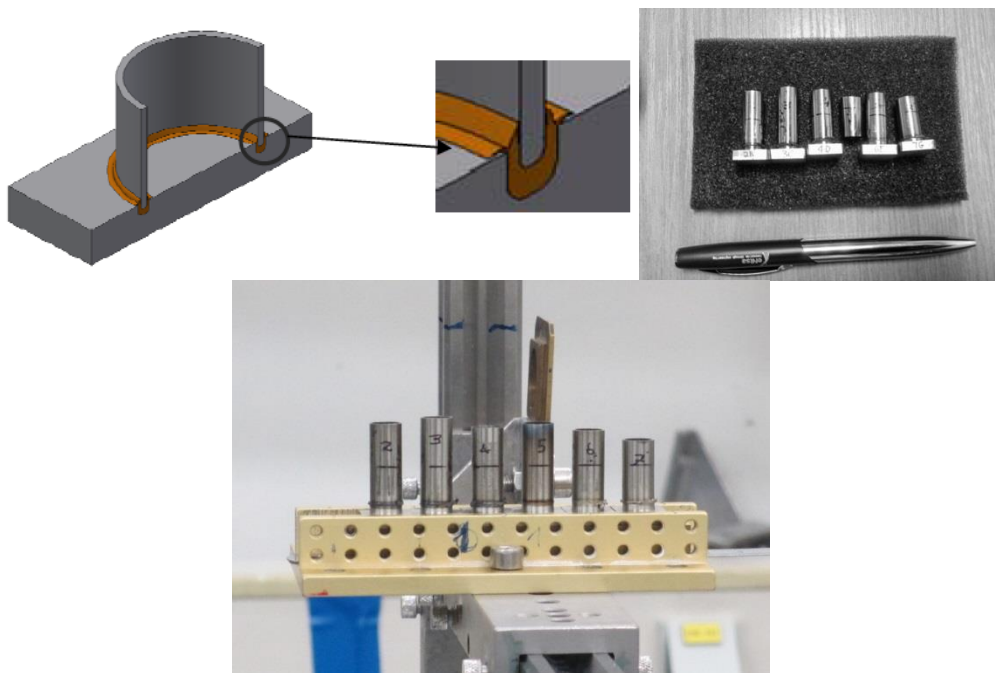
Illustration of the set-up (top left) and the actually welded samples (bottom right) with the set-up on beam line shown at bottom.
